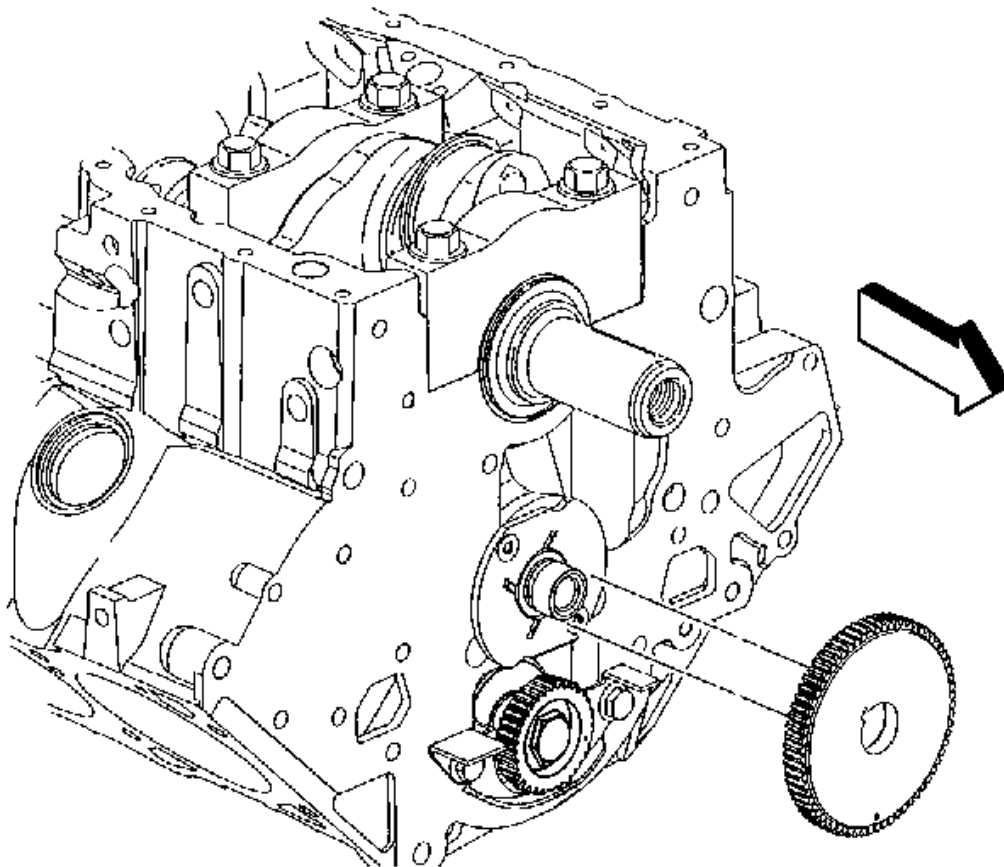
Removing Balance Shaft Drive Gear (L36)
